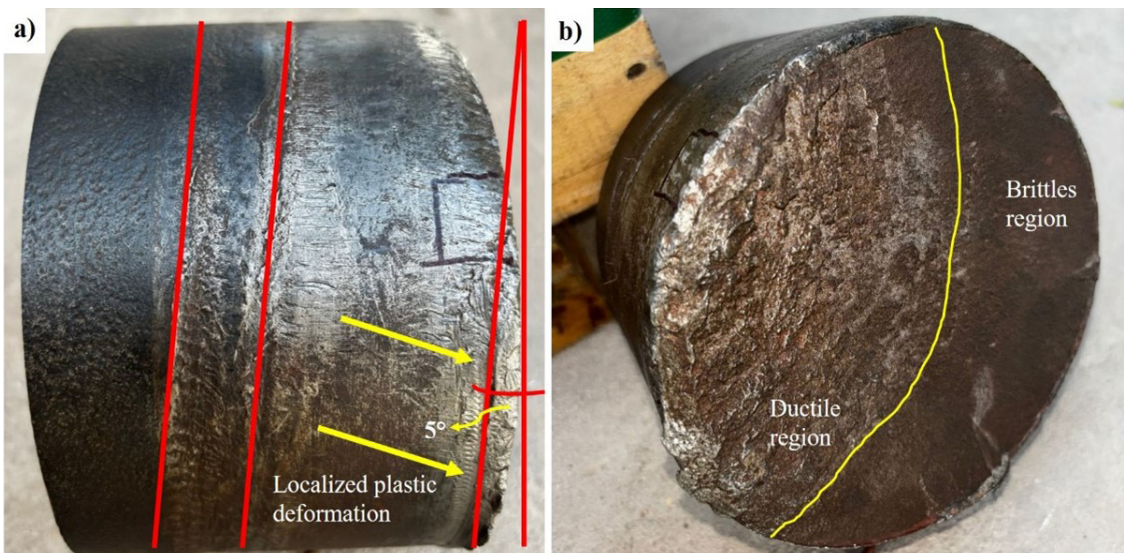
a) Visual profile of shaft wear and b) Macroscopic shaft fracture surface appearance after catastrophic failure.
